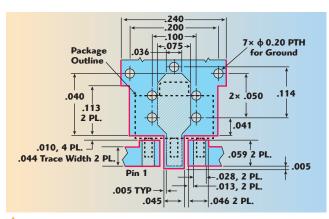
Suggested MMIC amplifier PCB layout. tance of the PCB which is dependent on PCB design. A thermal design using the PHA-1+ as an example is described.
